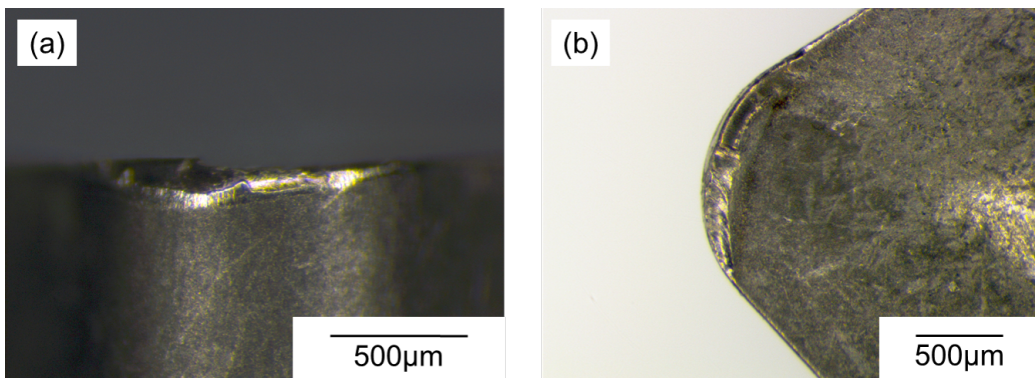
Microscope images showing the degree of tool wear after trial prep 6 on billet 4.1. Showing (a) the flank face and (b) the rake face.
